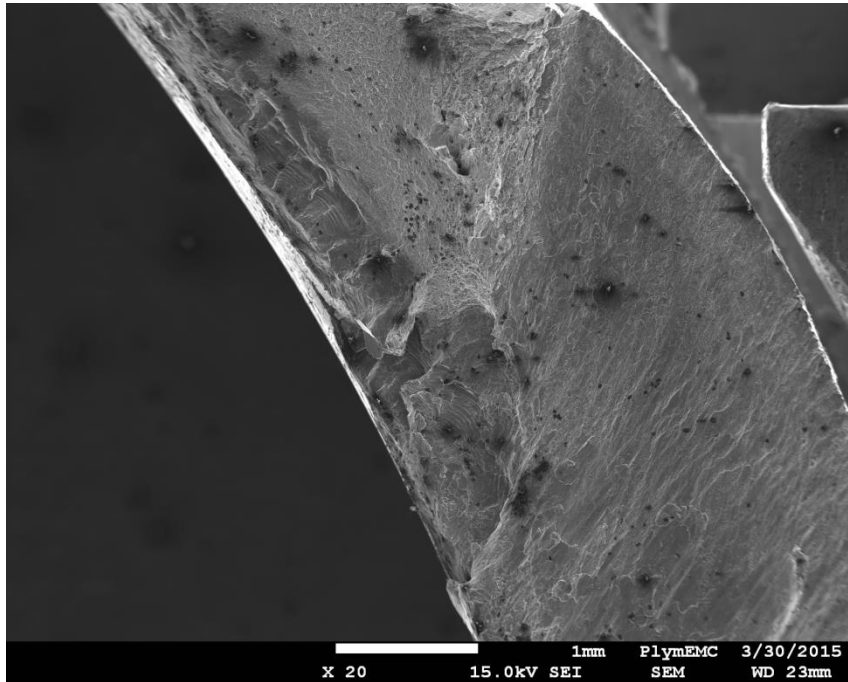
Clear evidence of initiation of the primary fatigue crack from the outer edge of specimen IPh2 can be seen at the upper right hand corner in this image.
